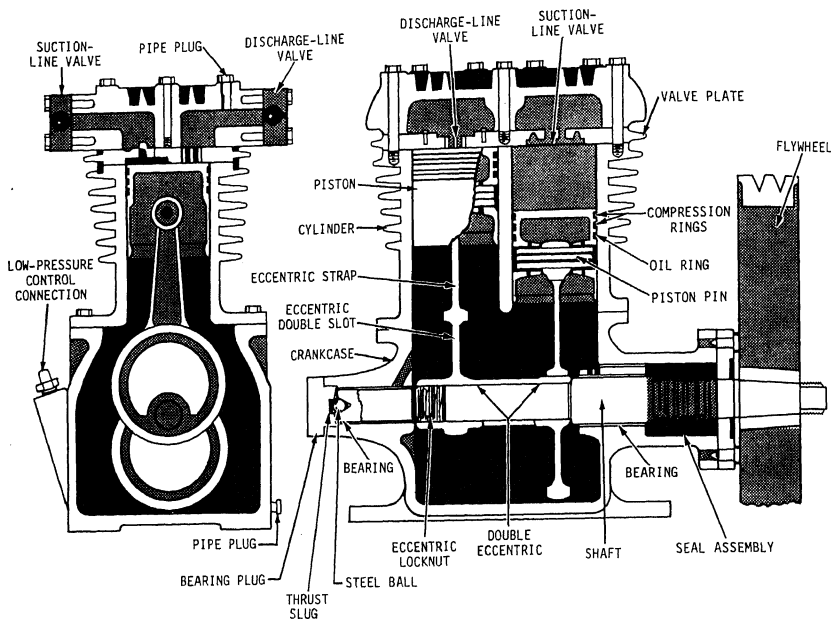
Cross section of an open type of eccentric-shaft compressor.
